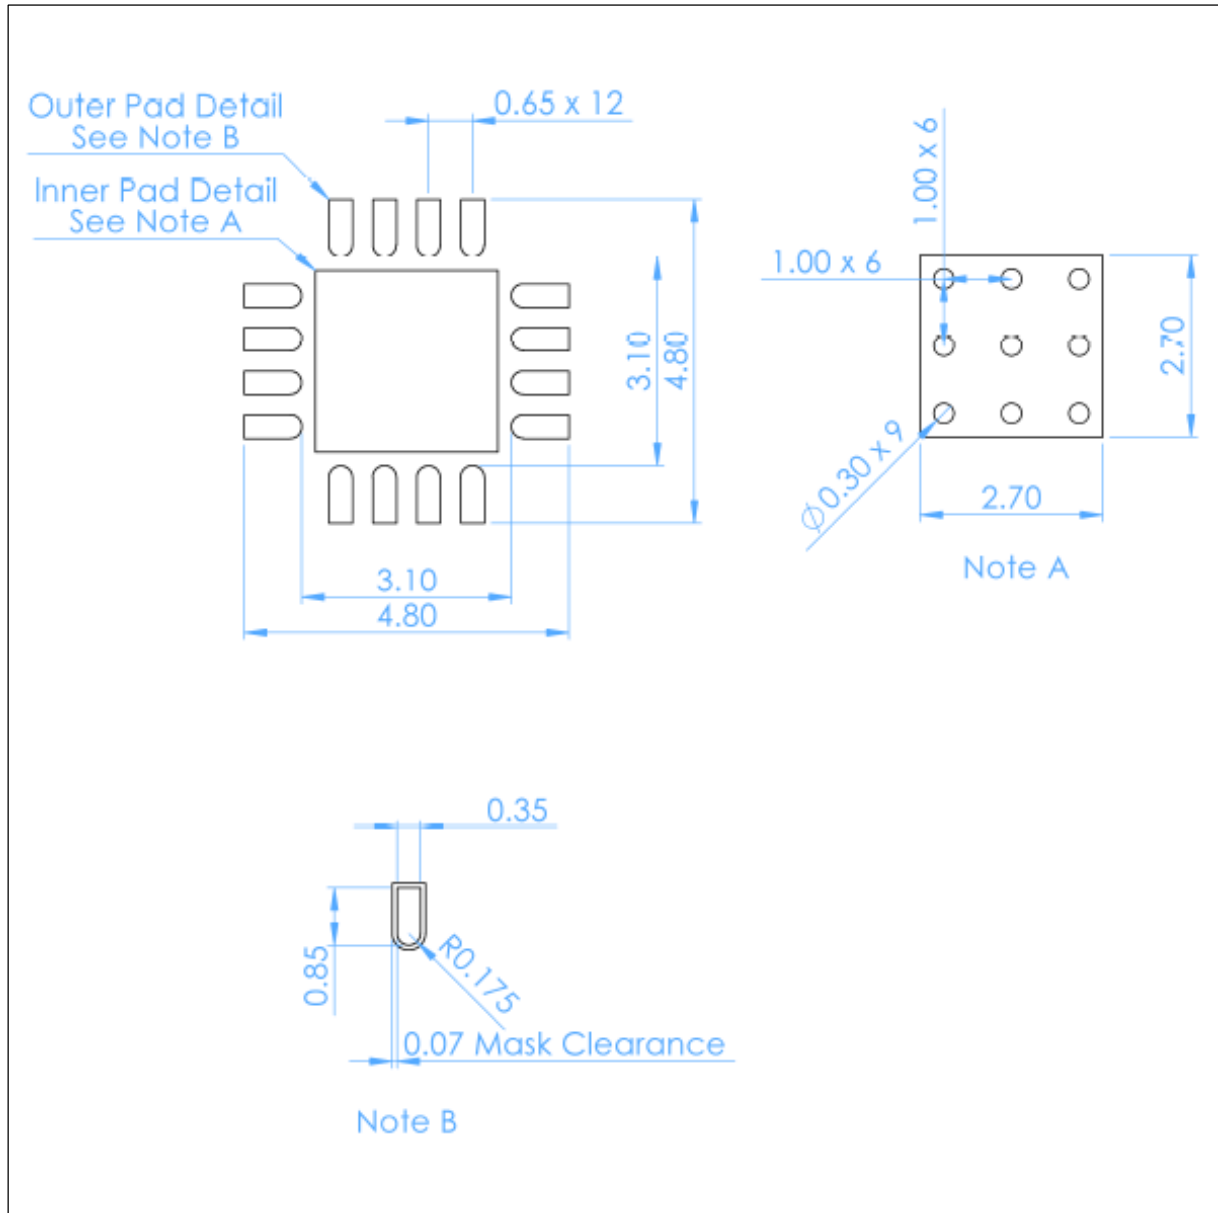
Suggested PCB footprint. All noted dimensions in mm. Not to scale.
